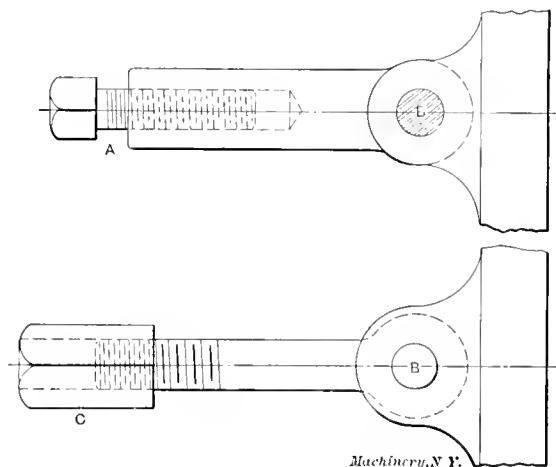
Clamping Devices working on the Jack-screw Principle.
